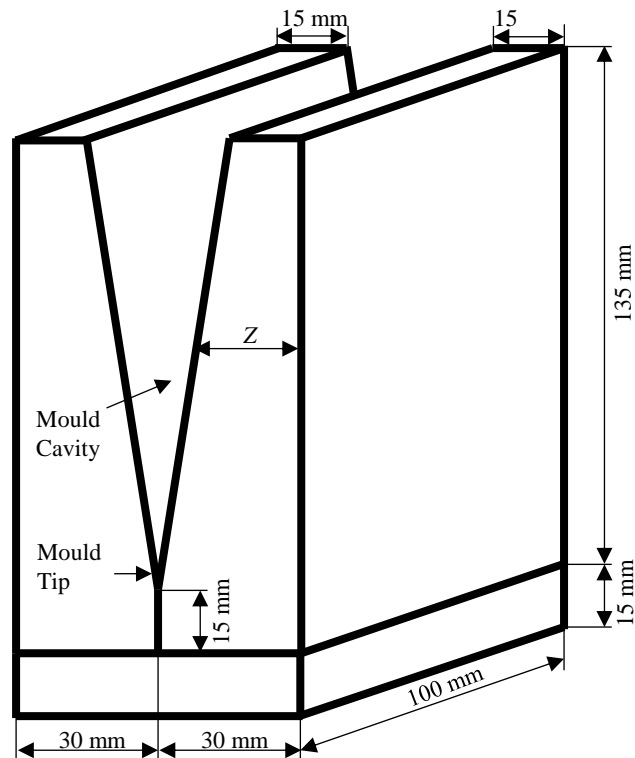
Schematic illustration of the Cu wedge mould showing mould cavity, half thickness of mould wall (Z) and mould dimensions.
